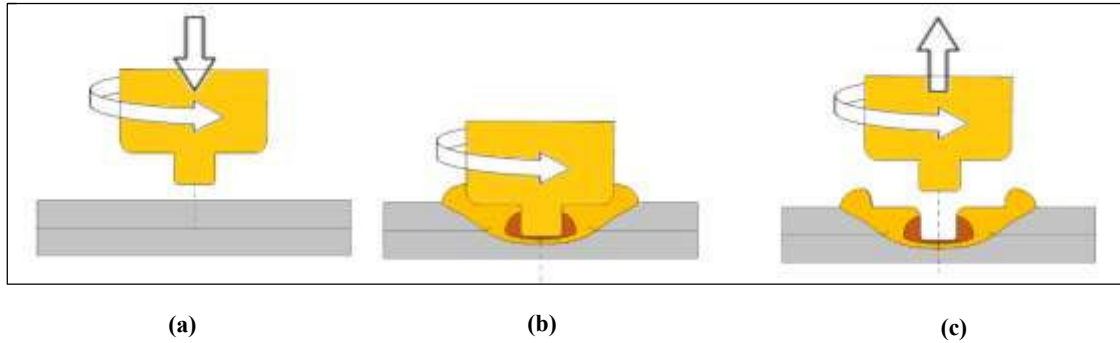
Friction Stir Spot Welding Phases, (a) Plunging Phase, (b) Stirring Phase, (c) Retracting or Drawing out Phase
